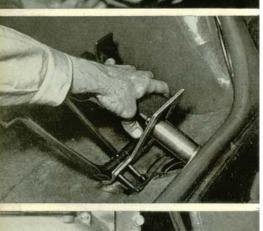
Protect the doors spring shroud with a cartoon cover to prevent its damaging. 11.Slacken four slotted screws on Fig. top of steering gear housing. (screwdriver 8 mm) Fig. 12. Turn steering screw out of steering nut by rotating steering wheel in an anticlockwise direction. Caution: Guide the steering column with the hand, so that the steering screw leaves the housing vertically. Fig. 13. Envelop the steering screw with a clean cloth. Caution: When assembling make sure that the punch mark on the steering screw registers with the correspondent mark on steering nut, eventually mark steering screw and nut together. 14.Slacken four screws fixing steering gear housing to the floor board. (socket spanner 14 mm, on vehicles of recent construction use plug wrench 6 mm) Caution: The steering gear housing cannot be lifted unless job 15 and the following ones have been carried out. B) Jobs to be carried out on the vehicle's underside at front Fig. 15.Unhook accelerator pedal return spring on frame tube. 16.Remove cotter pin on accelerator pedal and push out the linkage. (cotter pin pliers) 17.Depress brake pedal, remove cotter pin from clevis pin and withdraw the latter. (cotter pin pliers) 18.Unhook clutch return spring on frame. 19.Depress clutch pedal, remove cotter pin and the linkage. (cotter pin pliers) 20.Disconnect horn wire from the electric horn. 21. Press steering gear housing slightly rearwards and remove upwards. C) Jobs to be carried out on engine side
